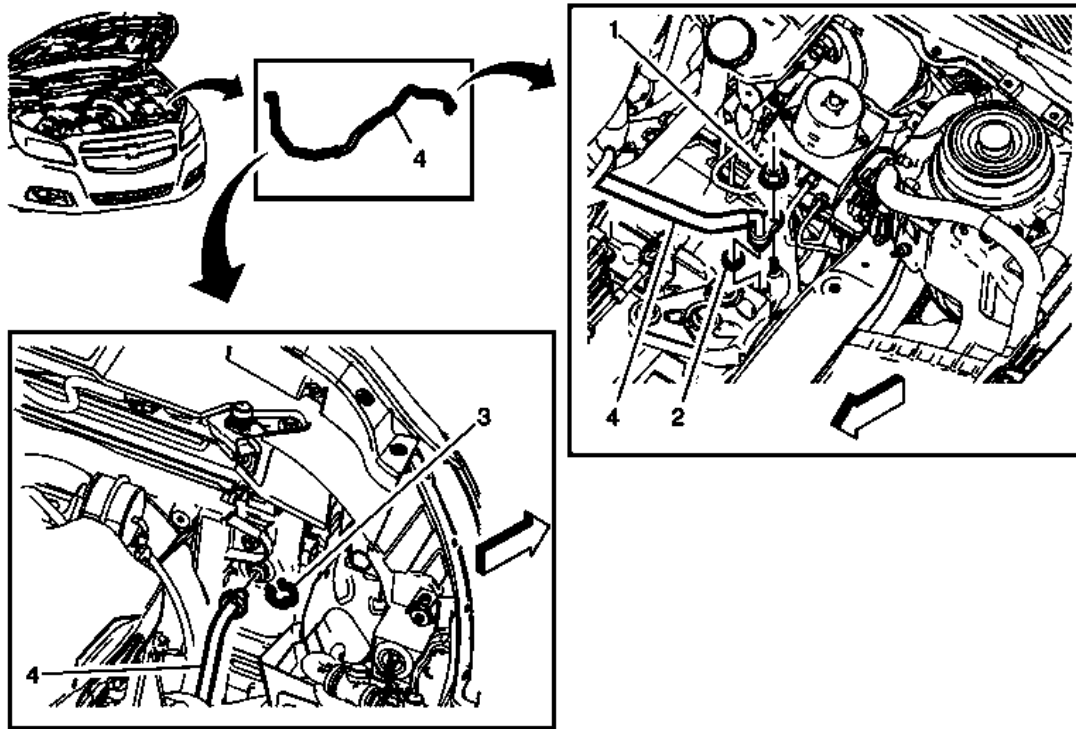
Transmission Fluid Cooler Outlet Pipe And Radiator (LTG)
